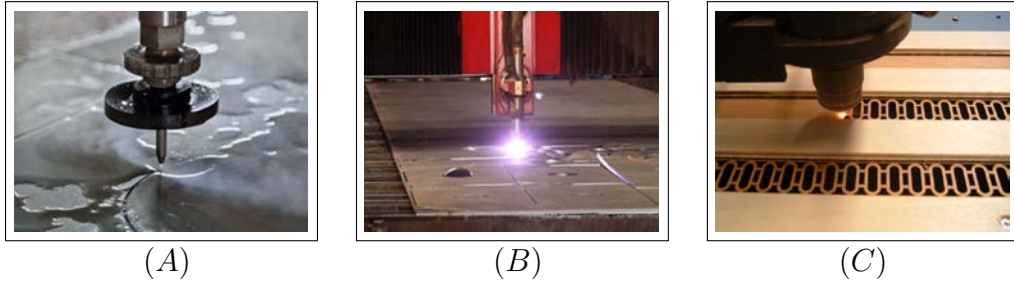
Illustrations of Non-Contact Machining Techniques; WJM (A), EDM (B), LM (C)
